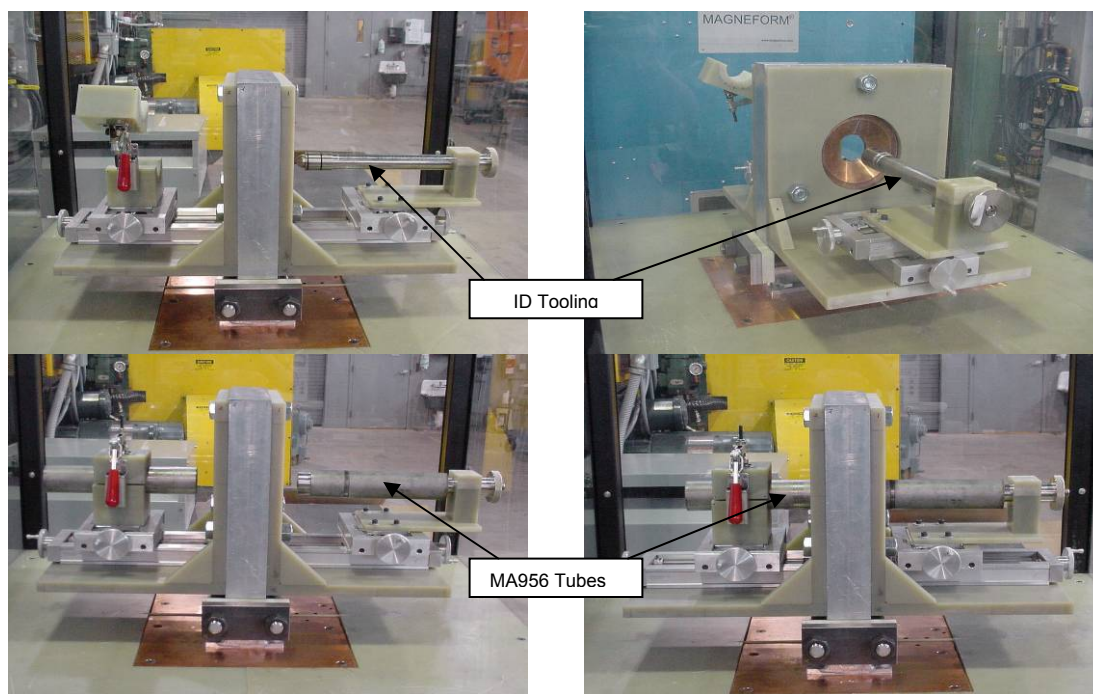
Tooling/fixture Setup for Magnetic Impulse Welding of Tube Test Specimens
